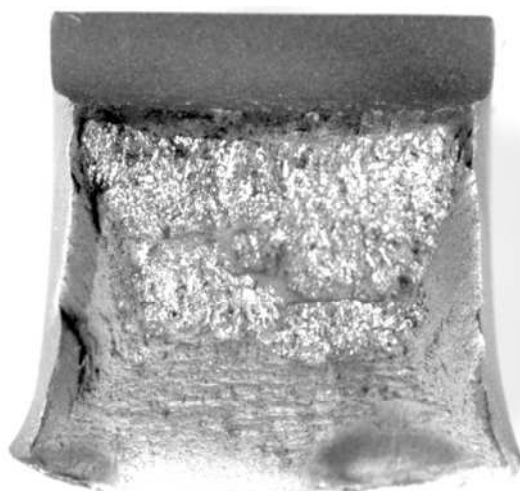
Charpy impact fracture surfaces showing cleavage fracture through the transition region to fully ductile fracture.
